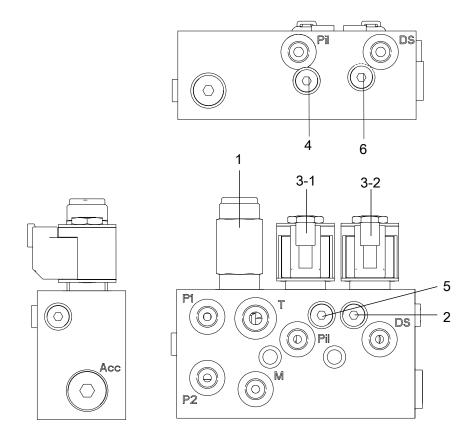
Brake/2-speed control valve (PN.202040000006)
